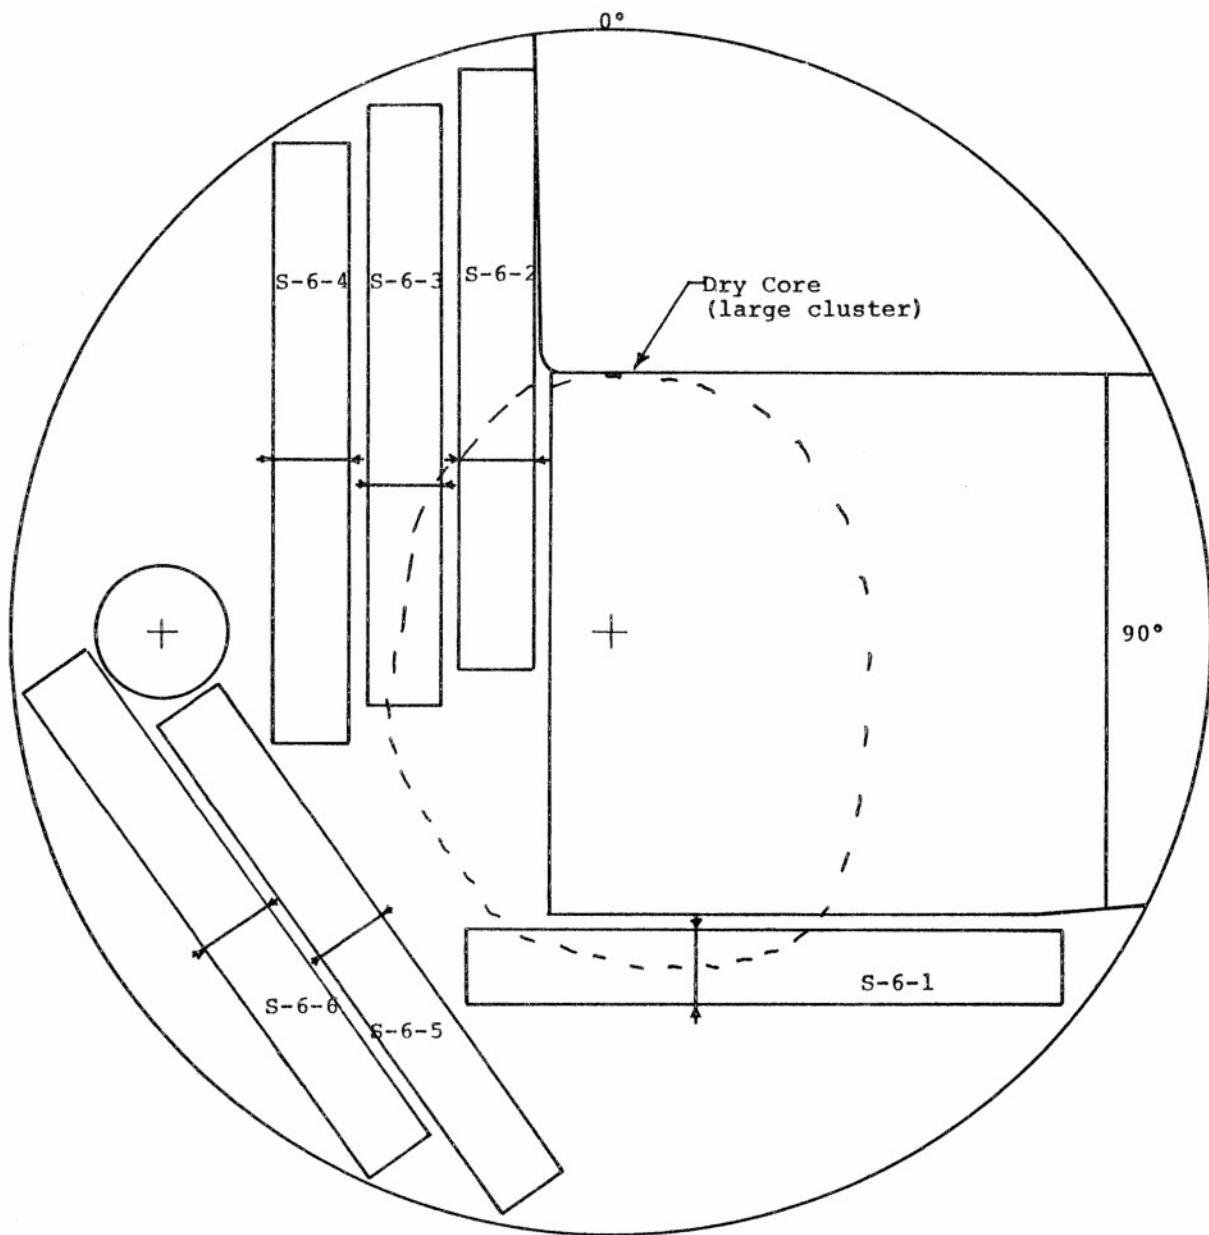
Cutting Plan Showing Results of Avco Ultrasonic Inspection of Specimen Blanks for Slab Number 6, ATJ-S Billet L-16-7
